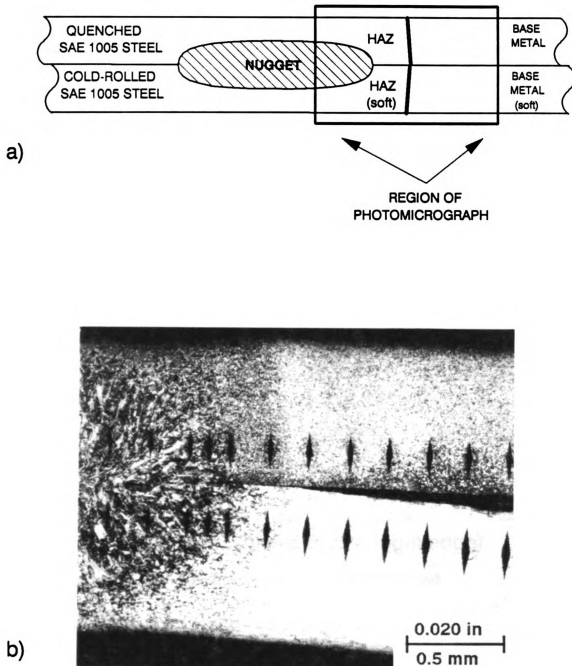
Coupon weld of heat treated SAE 1005 welded to cold rolled SAE 1005. a) sketch, b) photomicrograph.
